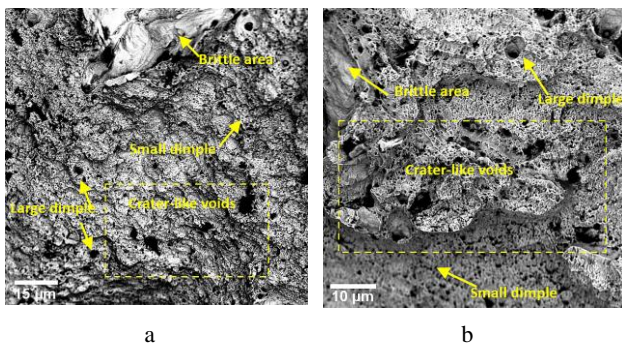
Fracture morphologies: a–LSLM-316L; b–HSLM-316L samples after tensile tests
